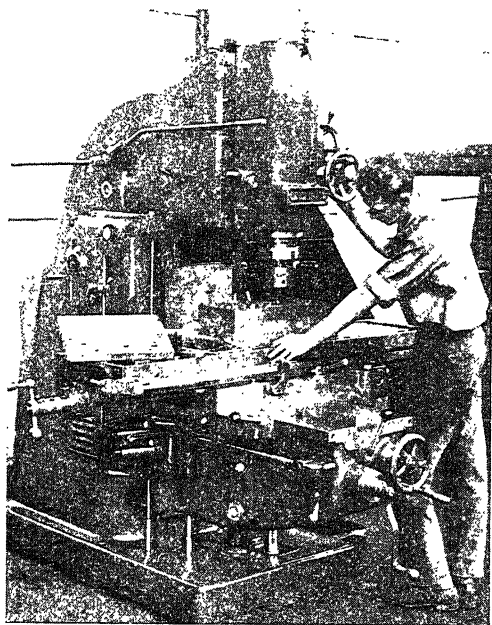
A toolmaker's job in a vertical milling machine. Boring a series of holes that must be accurately sized and exactly spaced. (Courtesy of Cincinnati Milling Machine Company.)
